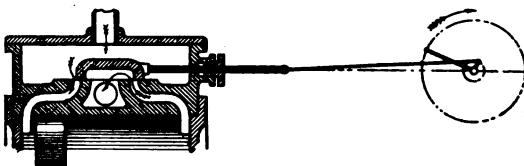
Elementary Slide Valve—Inlet and Exhaust Ports Partly Uncovered
